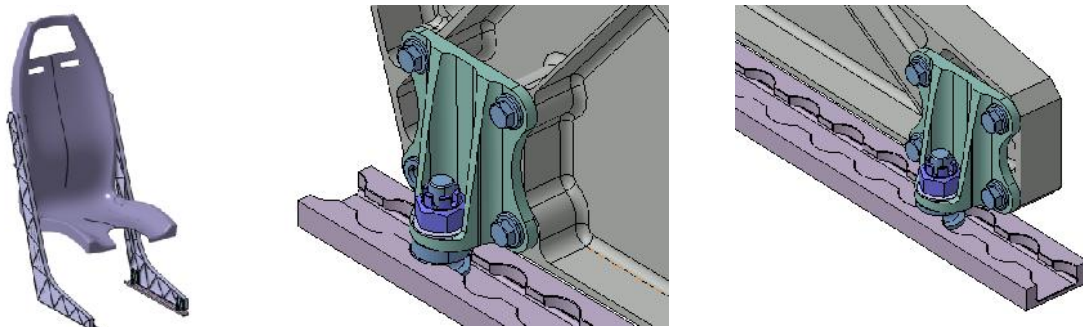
Isometric view of the crashworthy pilot seat and the attachment fittings
